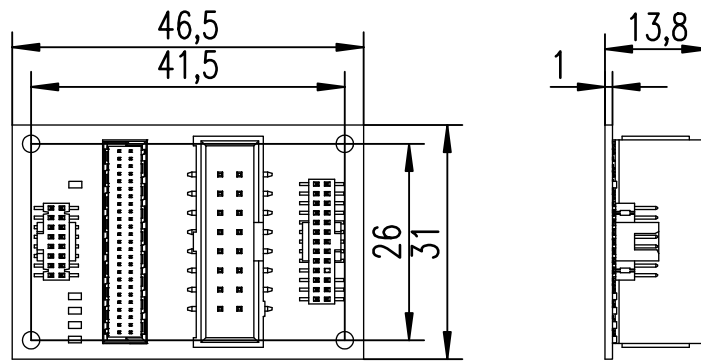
ETA F11 - Mechanical Dimensions and Component Placement
